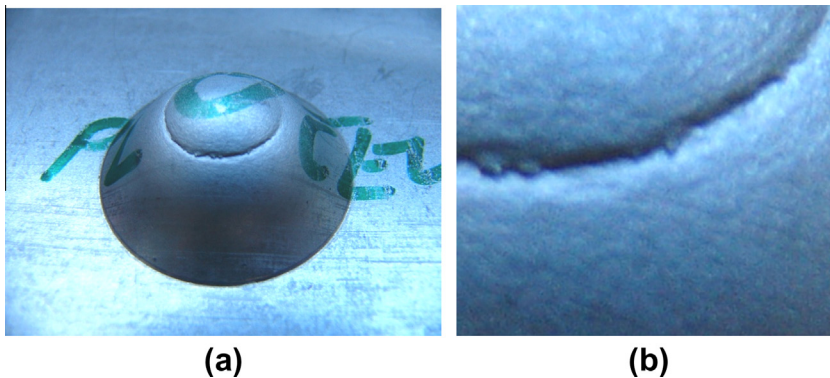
(a) Erichsens deep drawing test of Steel 1 sheet. Zn layer was compact. (b) Detail of contraction at crack confirms good workability of Steel 1.
